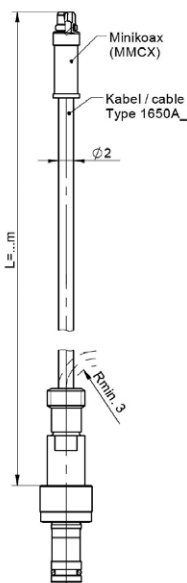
Sensor Type 6177B with coaxial cable and minicoax connector
